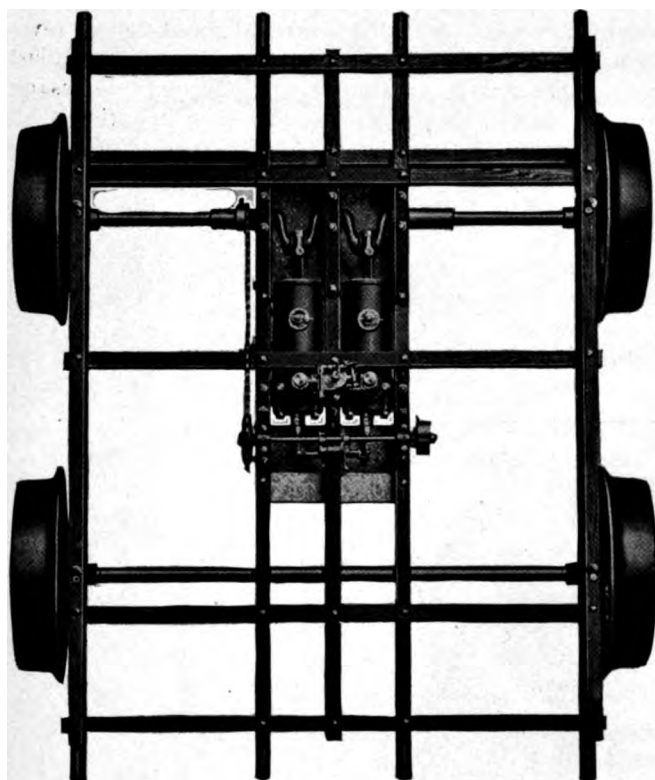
PLAN VIEW OF CHASSIS OF ROCKFORD CAR
